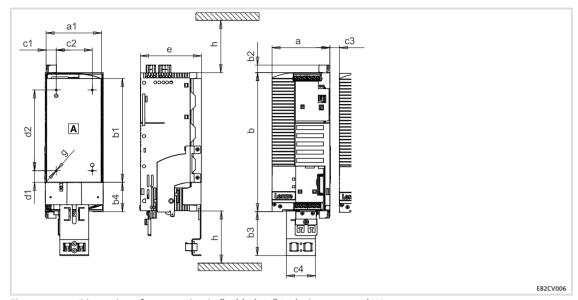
Dimensions for mounting in "cold plate" technique 3 ... 11 kW
